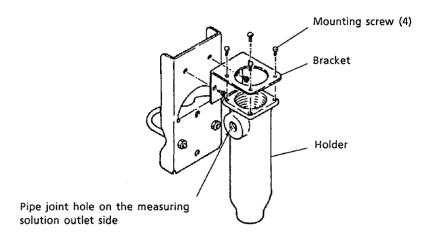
Bracket for Fixing the Polypropylene Resin Holder
